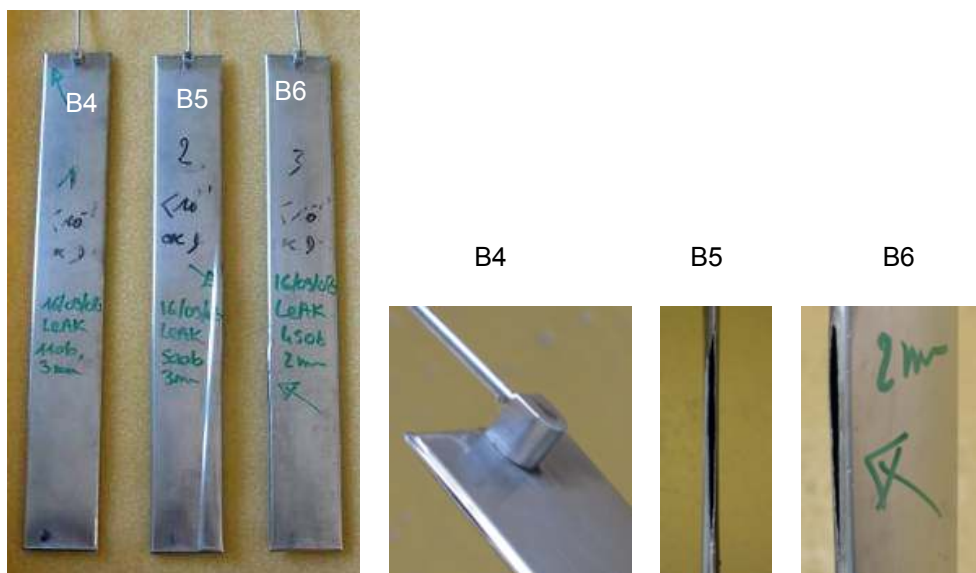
bladders from series 2 after leakage (outlook and detail)
